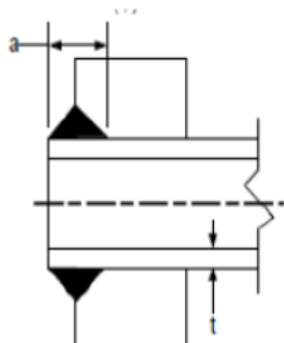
ASME tube to tubesheet weld detail, a is equal to 1.4t.
